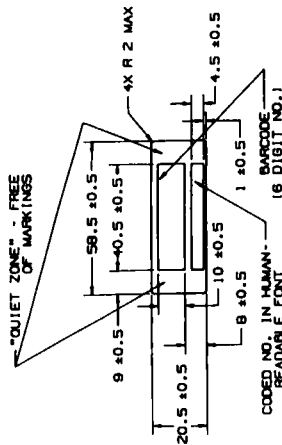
Right-Side Label Information Areas, Dimensions and Tolerances
